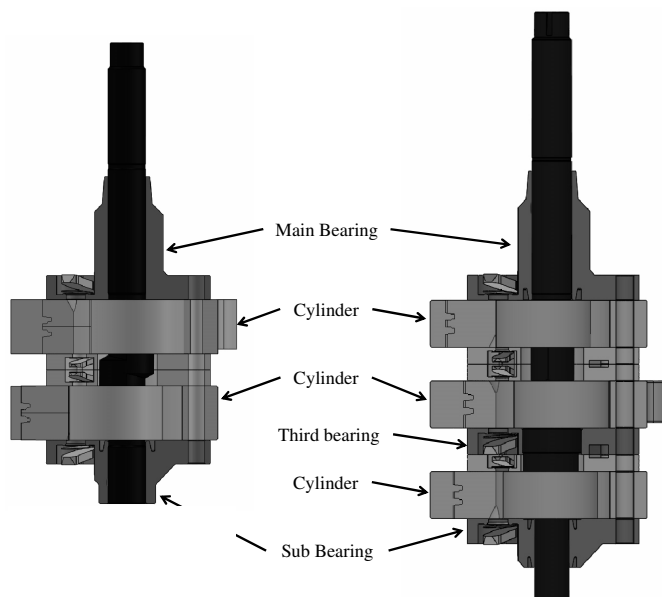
The compressor structure of the 2-cylinder and 3-cylinder rotary
